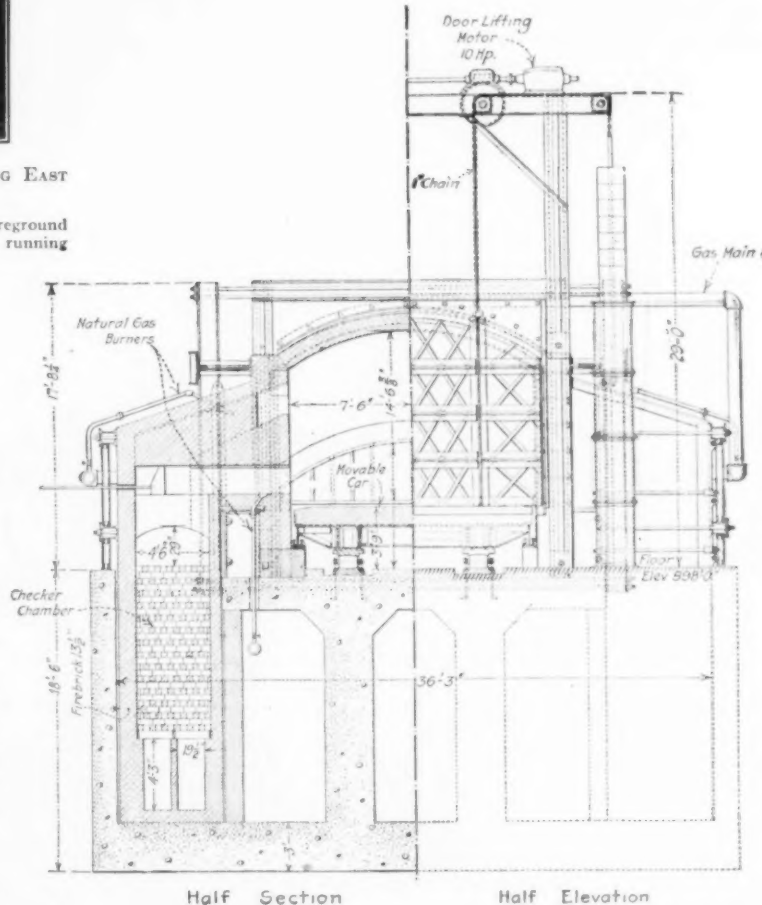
SECTION AND END VIEW OF CARBOTTOM FURNACES FOR ARMOR PLATE
